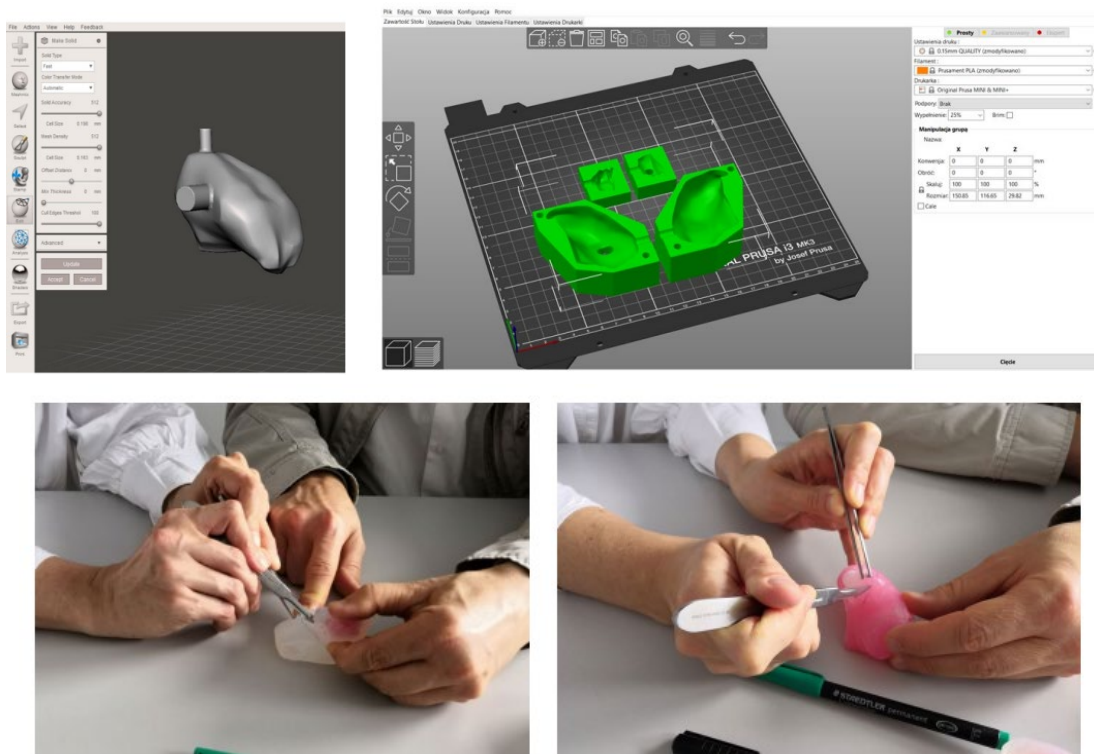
Designing steps of the part and the mold realized at PUT for producing the tongue model together with its colored tumor using Fused Filament Fabrication and Vacuum Casting
